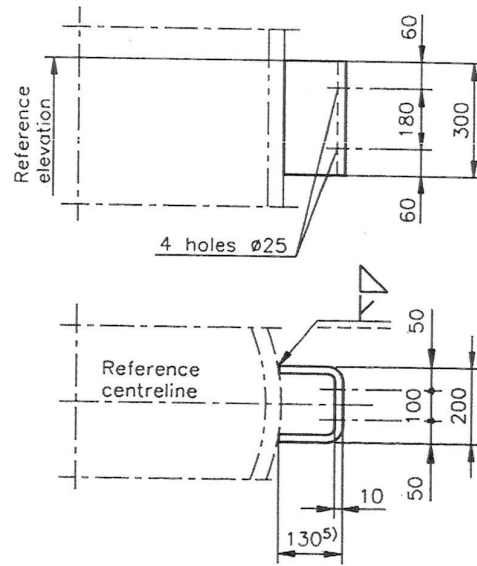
Clip, type 1E, welded to vessels with cold insulation
